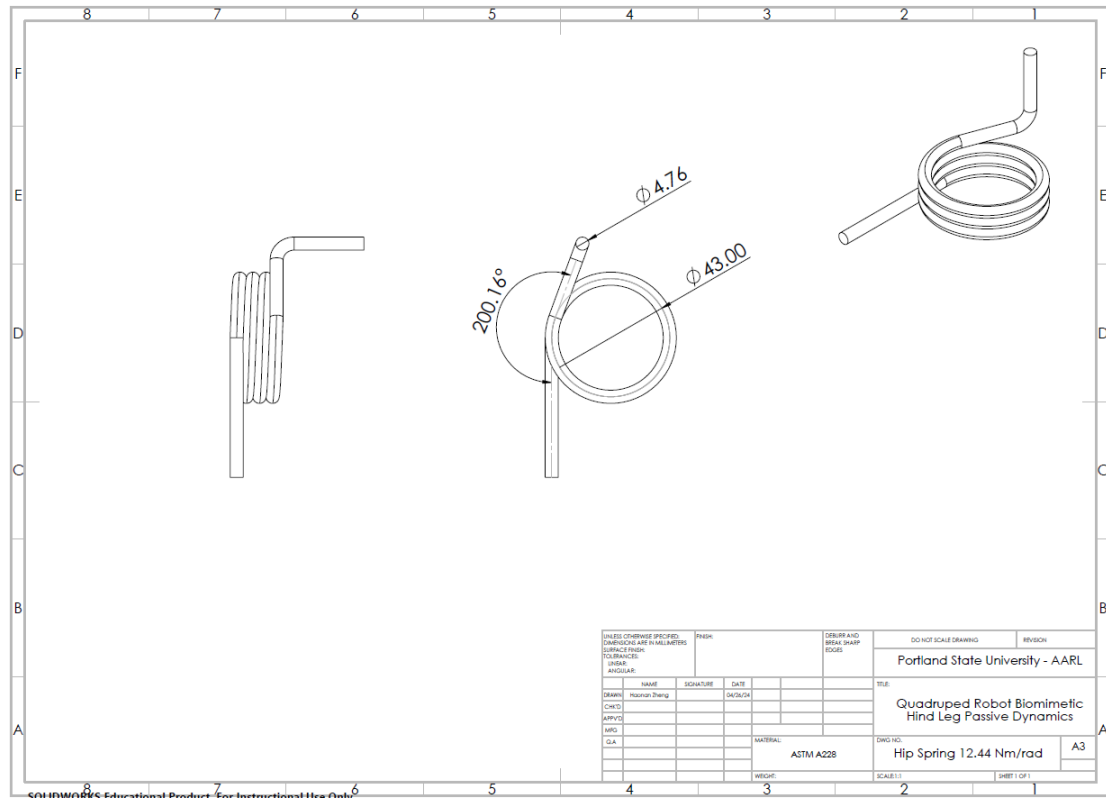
CAD drawing of hand wound torsion spring with spring rate 12.44 Nm/rad
